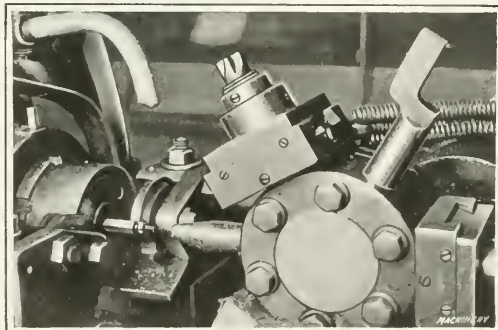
Producing Eccentric Screw shown in Fig. 7
